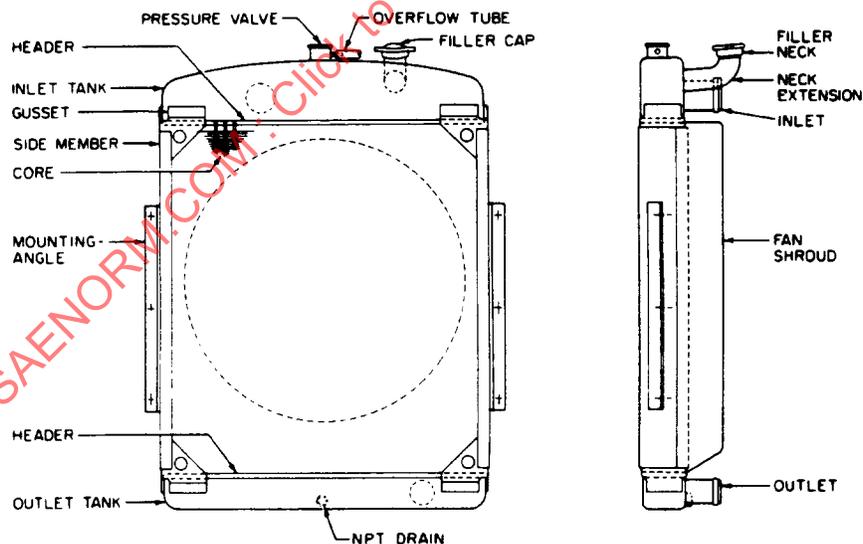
HEAVY-DUTY RADIATOR, SHEET METAL TYPE
